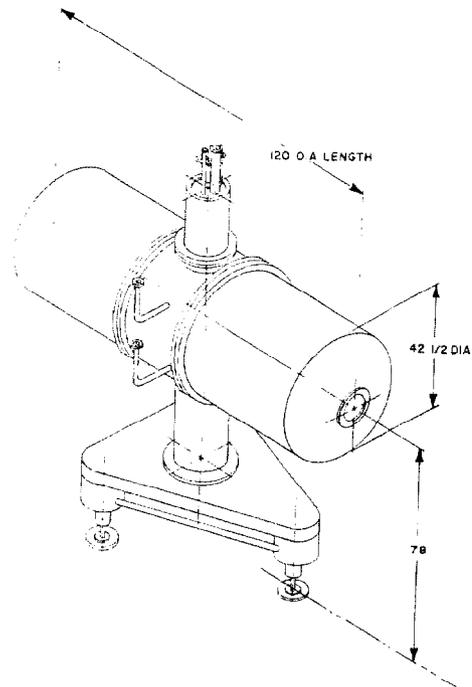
Physical dimensions of the HEUB dipoles (in.).
